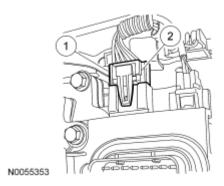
Identifying TR Sensor Electrical Connector Courtesy of FORD MOTOR CO.
